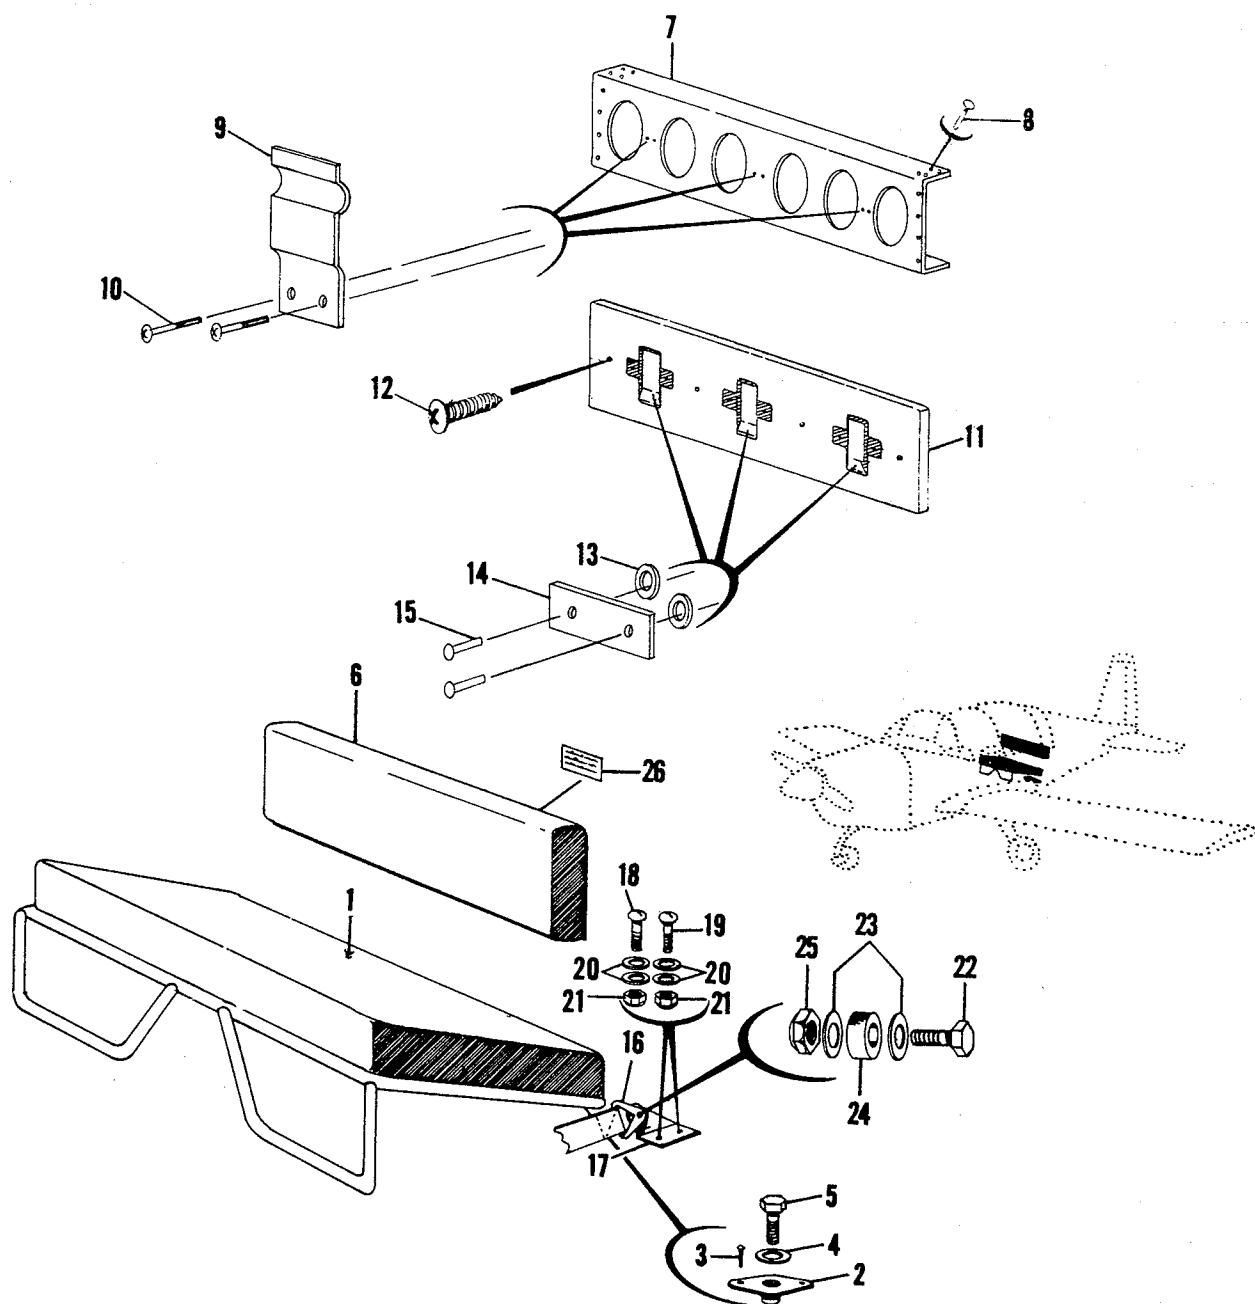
CHILD'S SEAT ASSEMBLY & INSTL.
